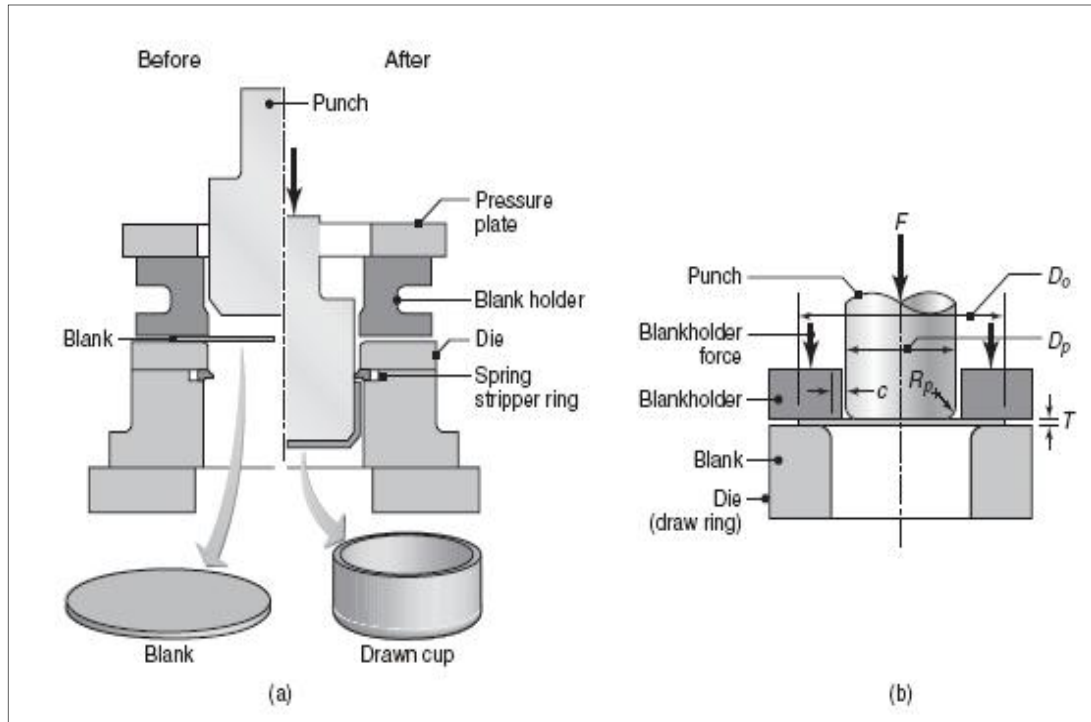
(a) Schematic illustration of the deep drawing process on a circular sheet metal blank. (b) The process variables in deep drawing. (Kalpakjian, Serope; Schmid, Steven, 2010).
